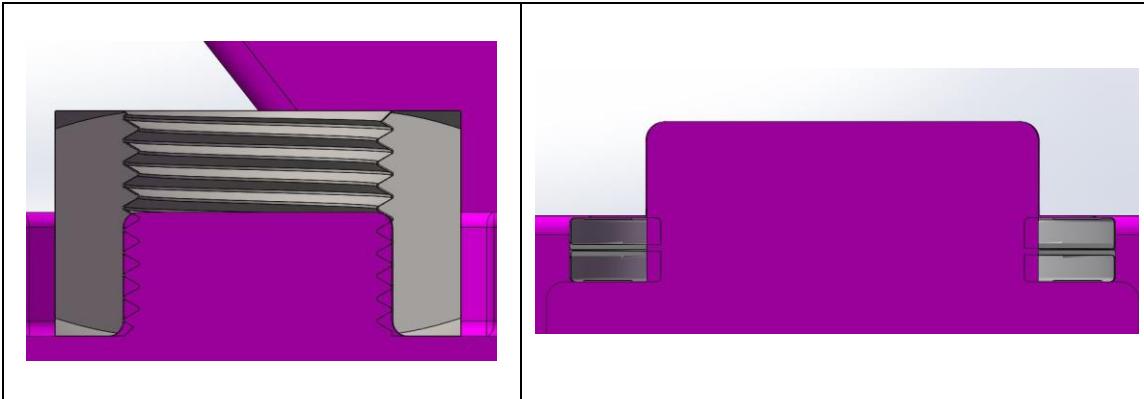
Internal interference occurs when suspension nut (left) and suspension washer (right) is inserted into the steering gear hardware fixture [67].
